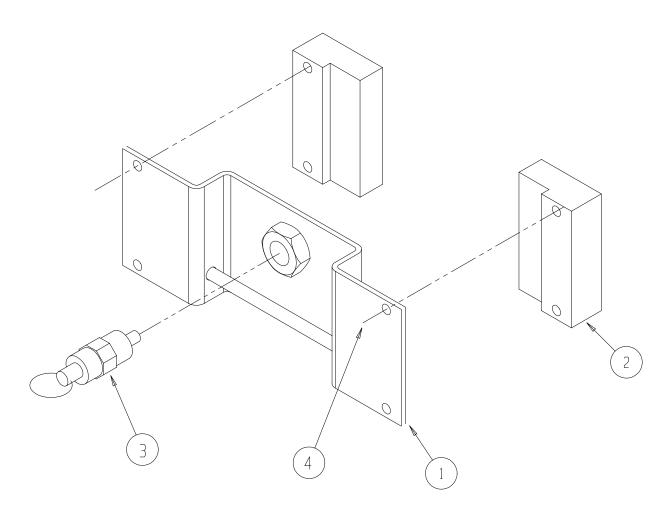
UL25/32/40 loader stop bracket assembly illustration.
